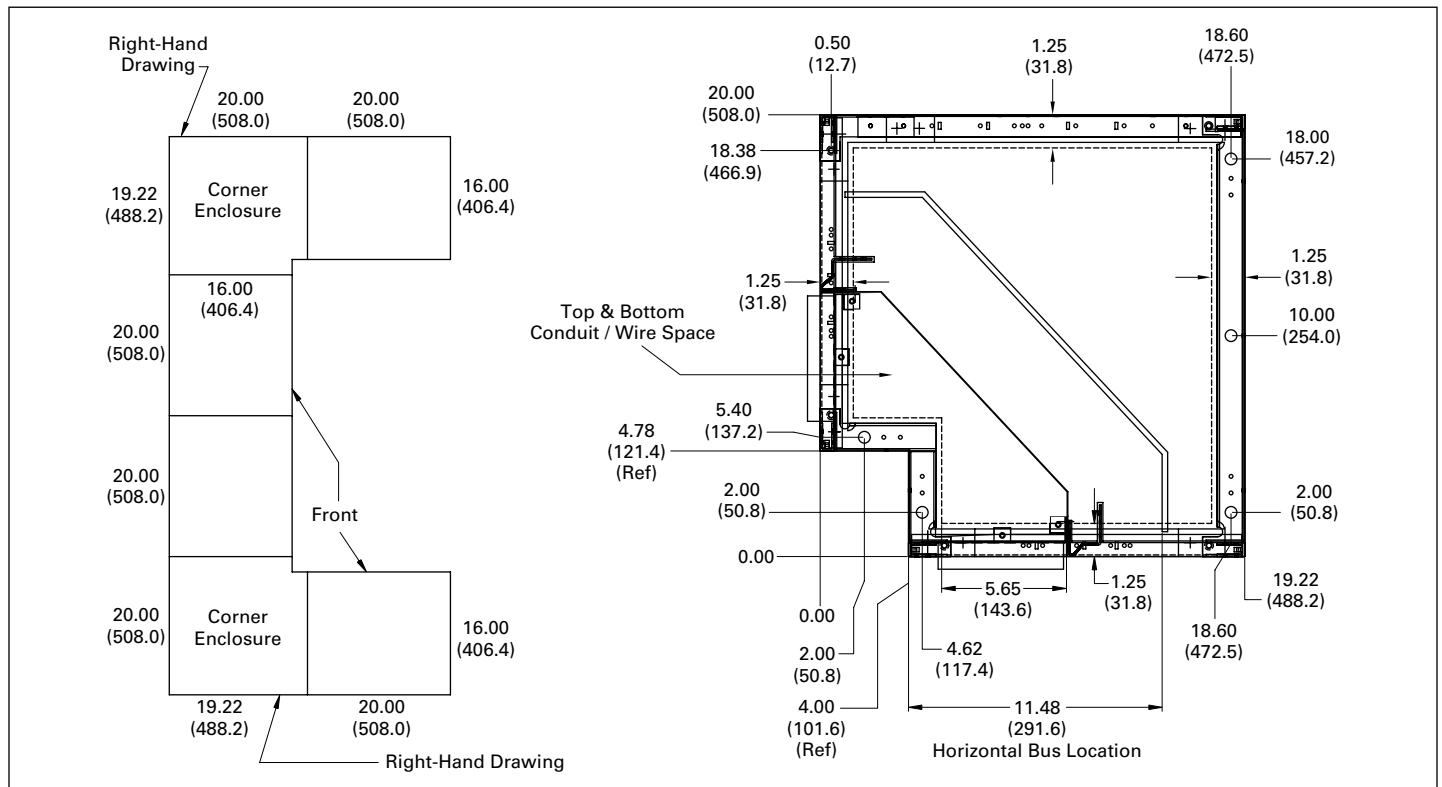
16.00-Inch (406.4 mm) Deep—Front-Mounted Corner Structure (inside corner shown; consult factory for outside corner option)
